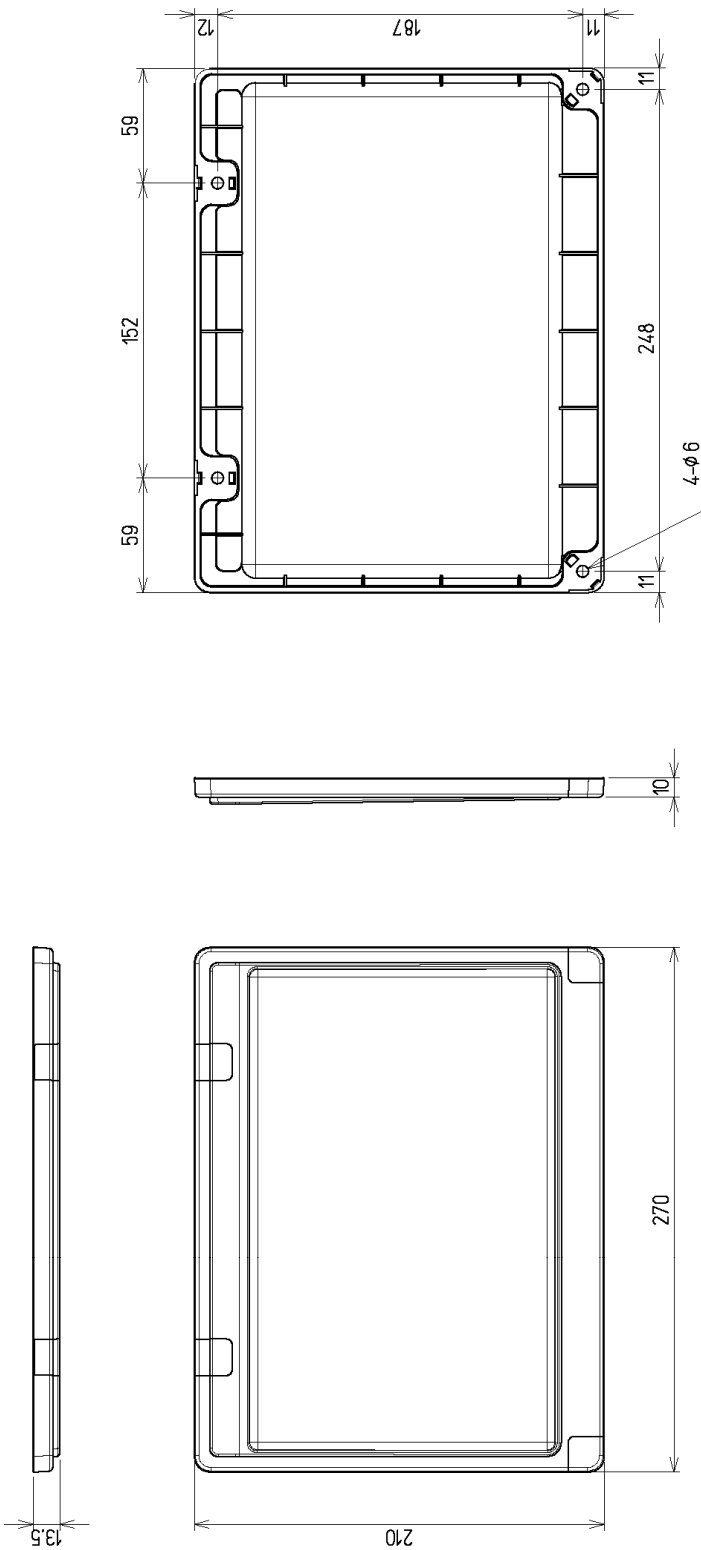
Outline Drawings of NCE-5625 Keyboard Operation Unit
